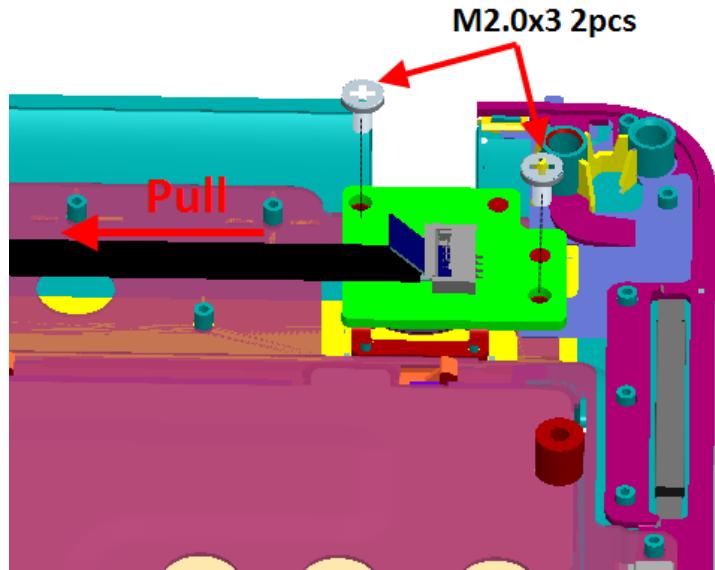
Remove the screws and Power FFC from the Power Board
